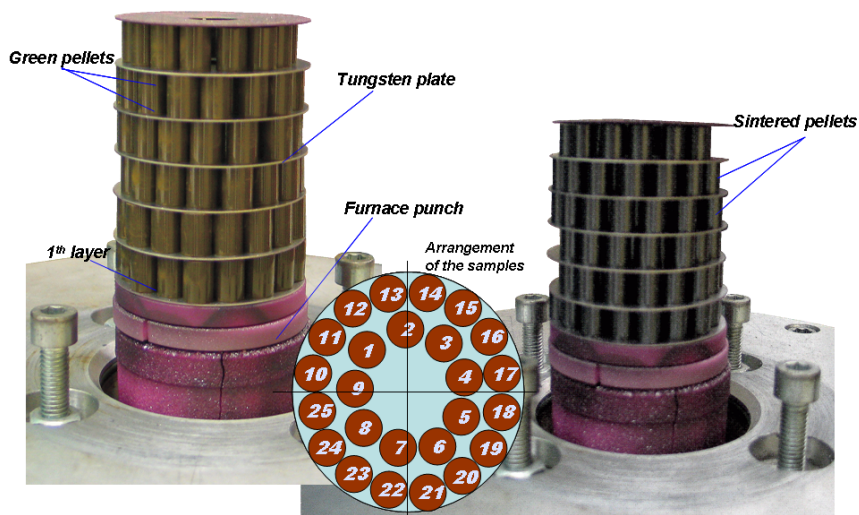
Green and sintered pellets arrangement in the sintering furnace.
